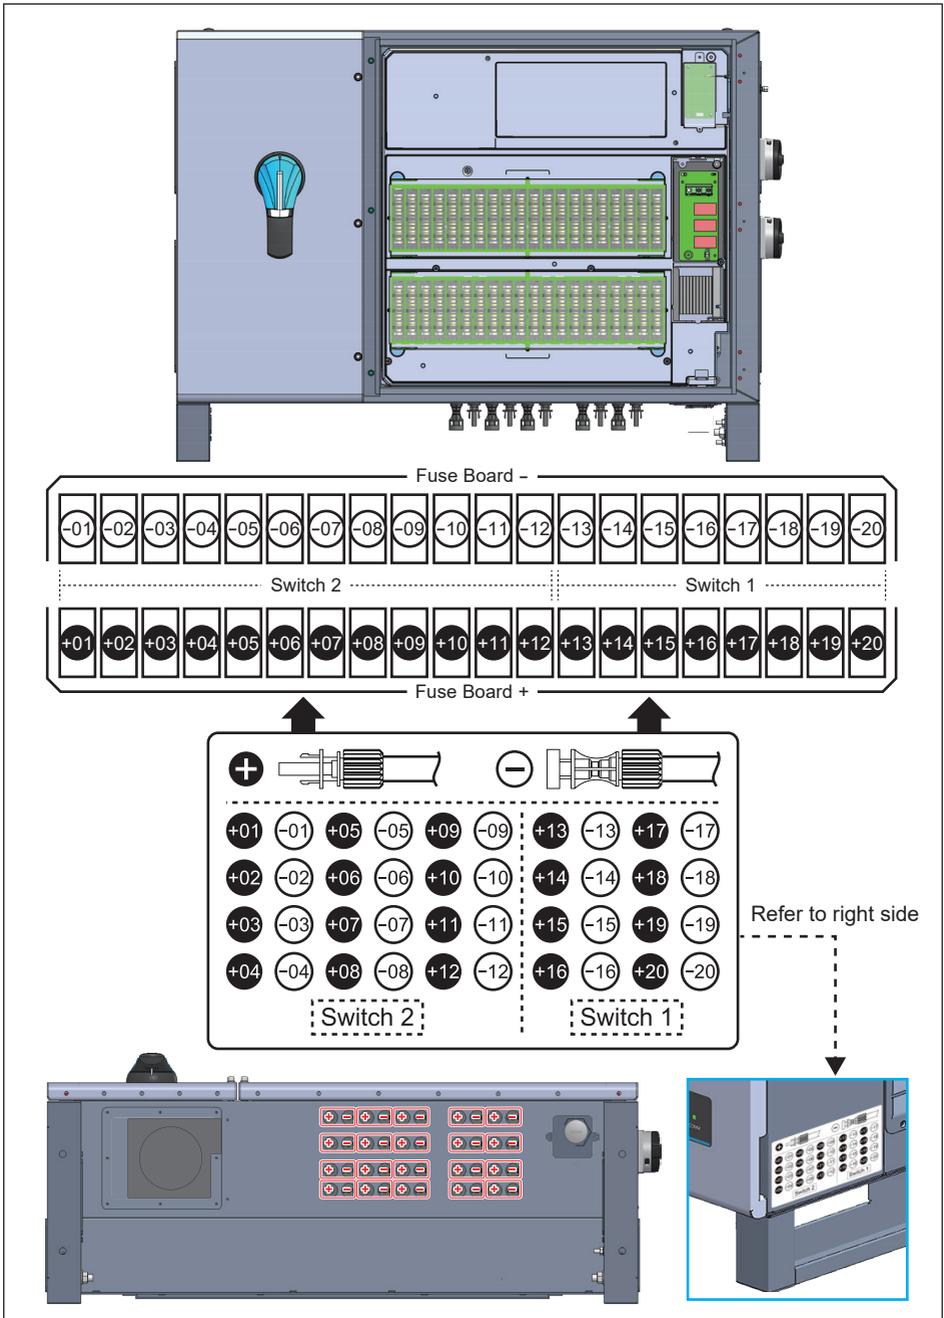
M125HV layout and bottom view of inverter chassis showing location of UTX connectors
